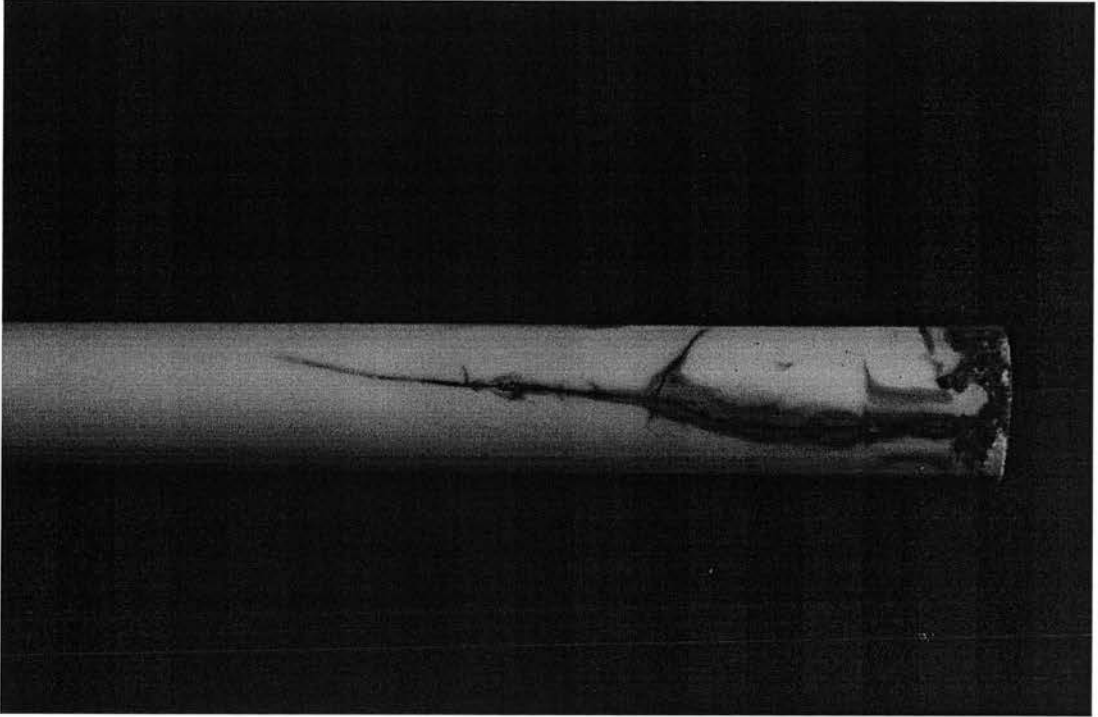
Photograph showing typical cracks in the alumina laser tube.
